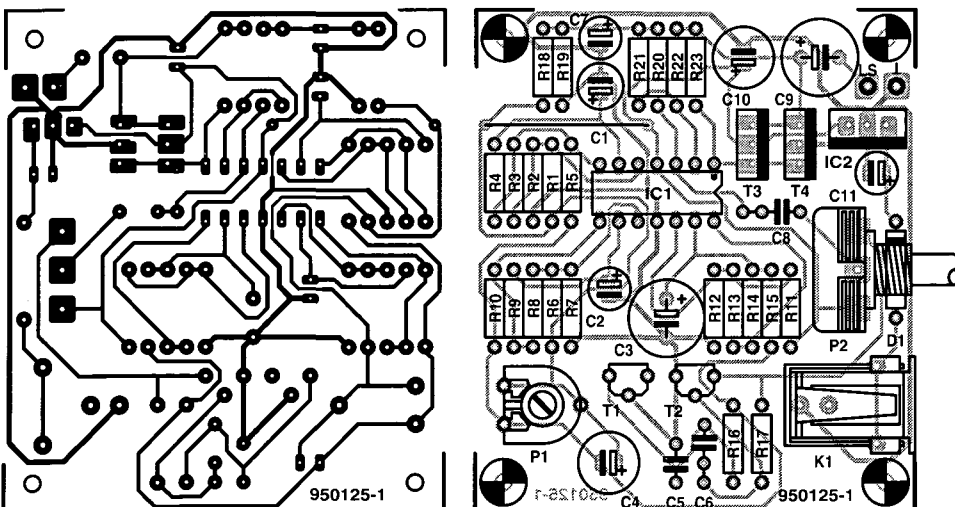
PCB track layout and component mounting plan (board not available ready-made through the Readers Services).
